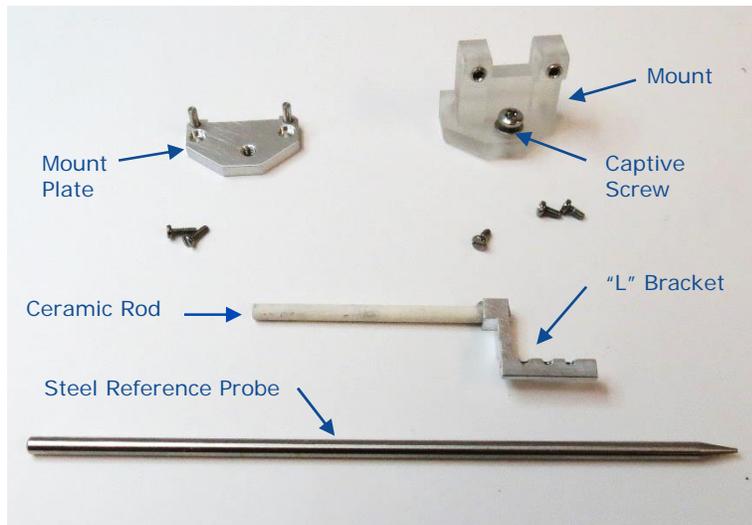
MPM Probe Mount-2 components. The probe mount assembly is installed and removed using one captive screw.
